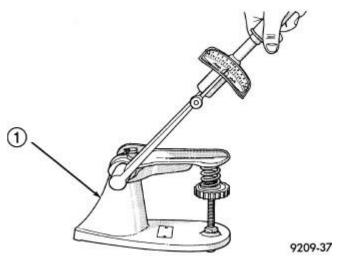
Testing Valve Spring Courtesy of CHRYSLER LLC
